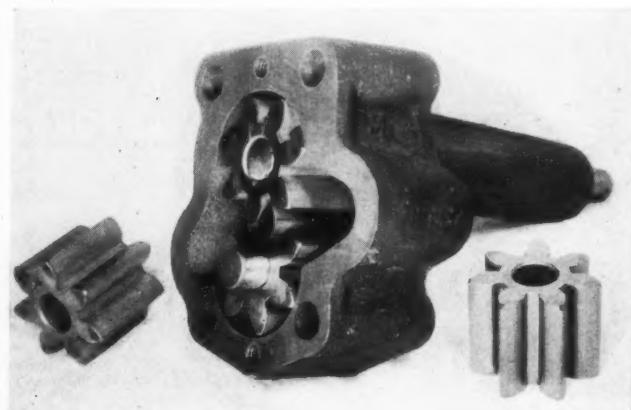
Saving of thirty-three per cent in cost is realized in this oil pump gear because no machining is necessary
